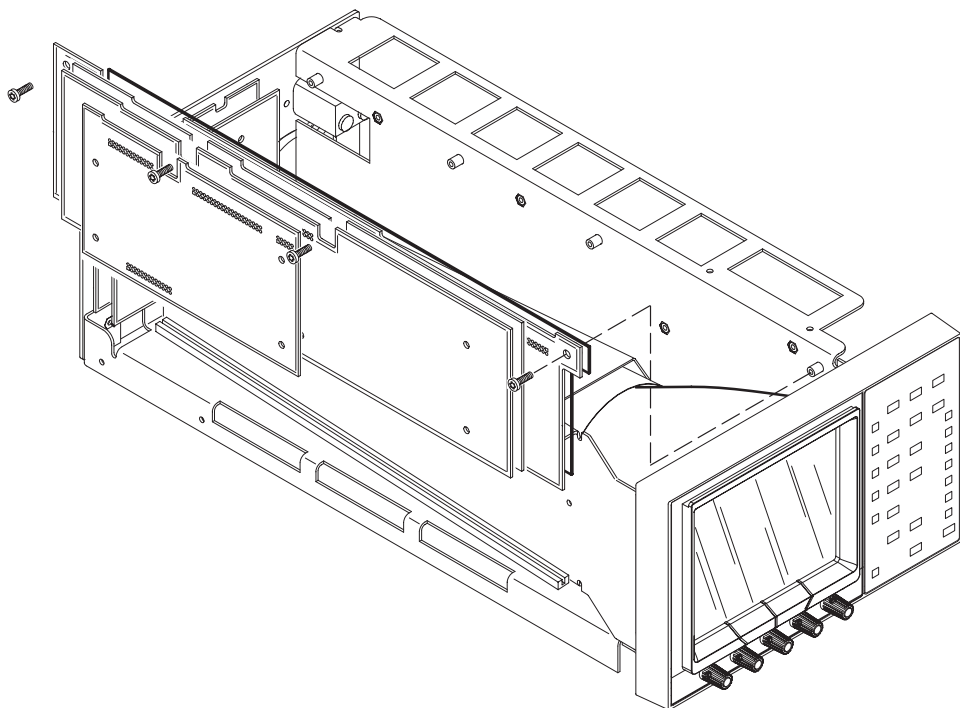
Securing the Component, Coprocessor, and DAC Board
